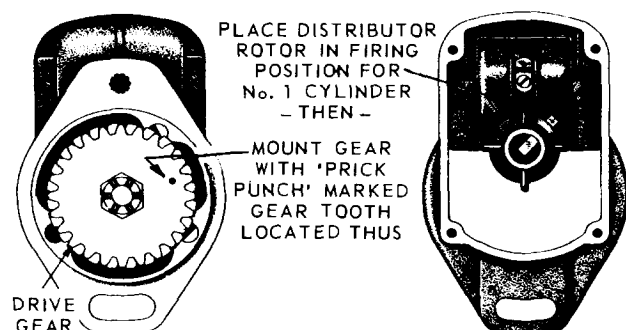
, DRIVE GEAR MARKING AND ASSEMBLY
